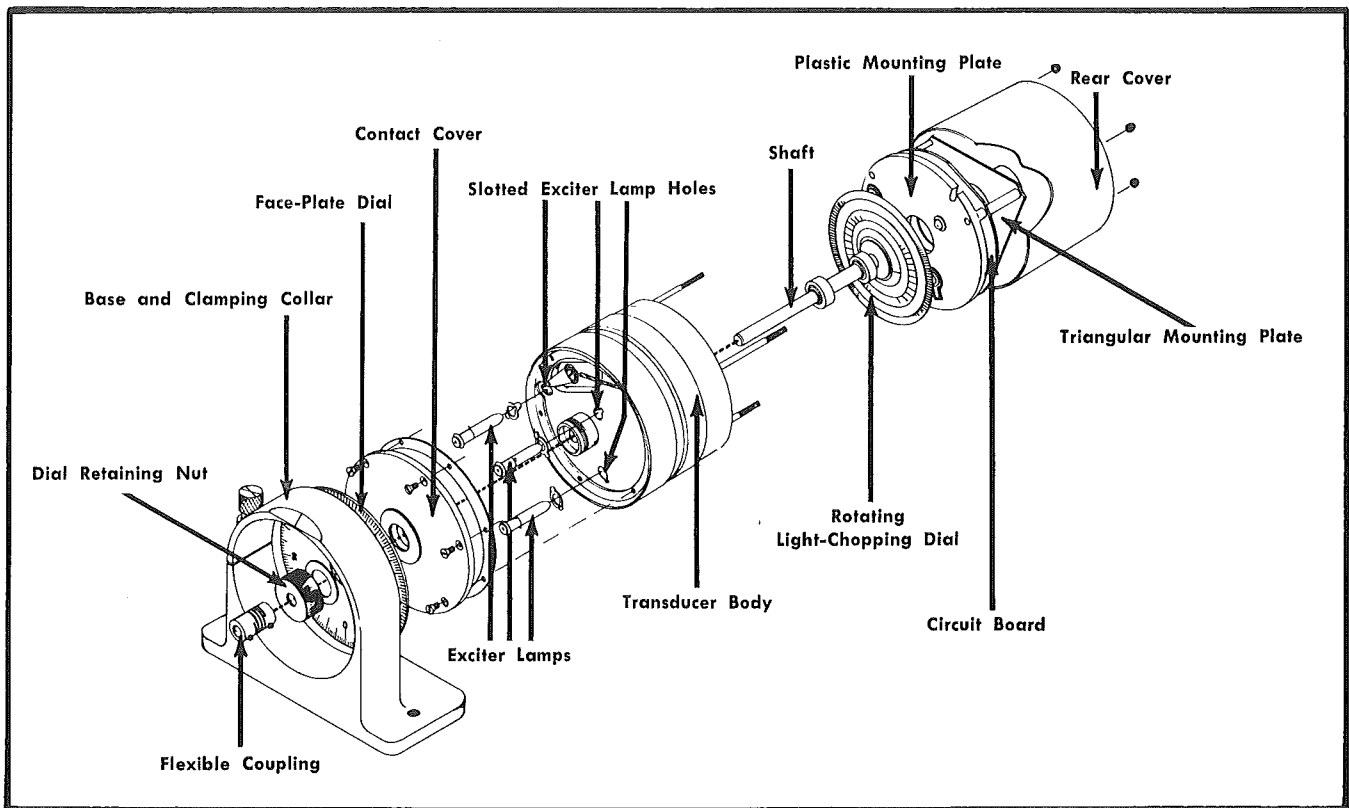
Breakaway view of major sections of Type 182B Transducer.
